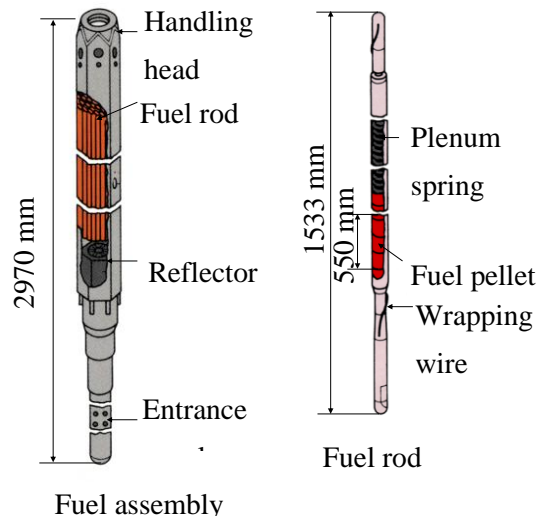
Outlines of “JOYO” fuel assembly and fuel rod
